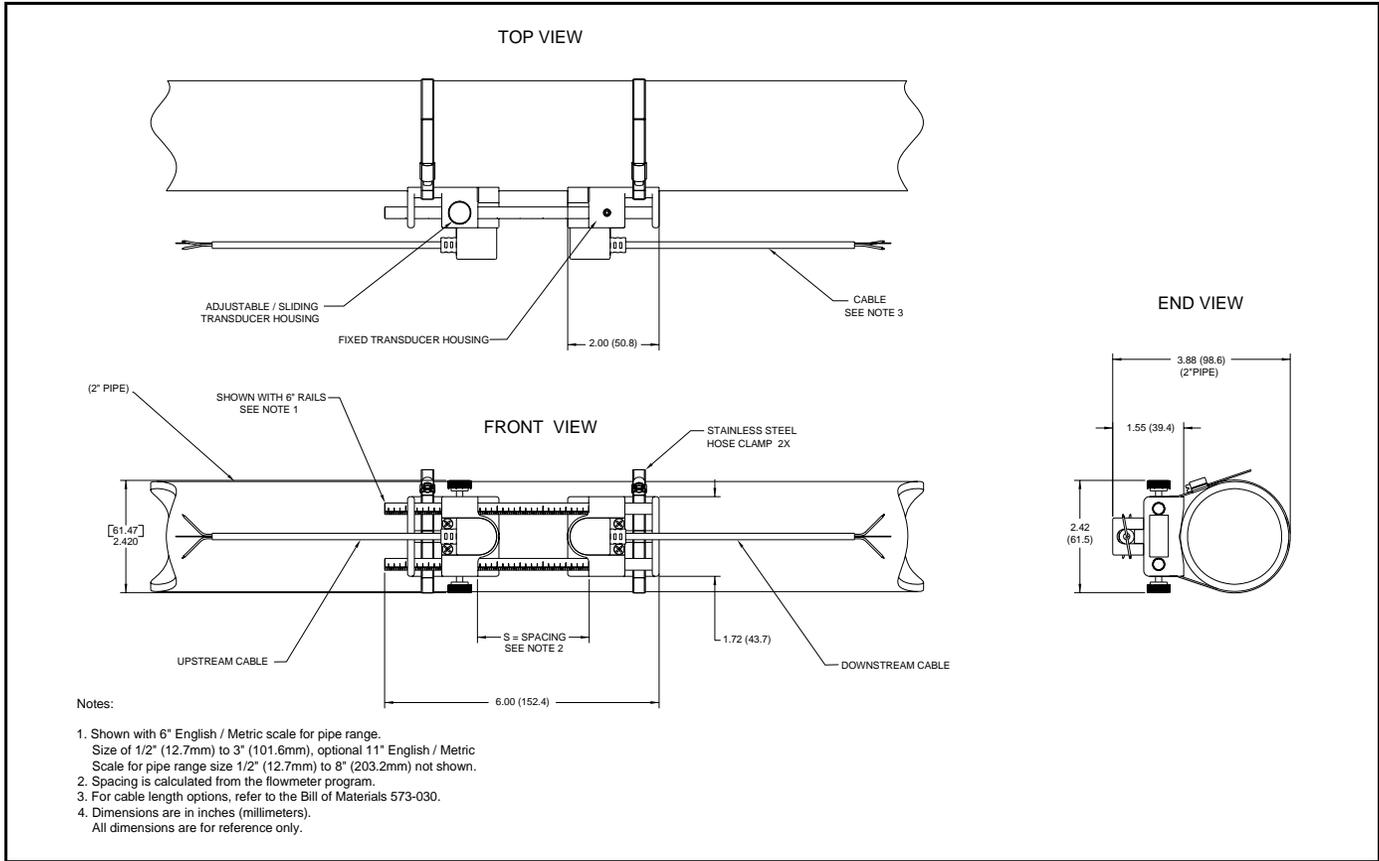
Clamping Fixture Outline and Installation (ref. dwg #570-076)
